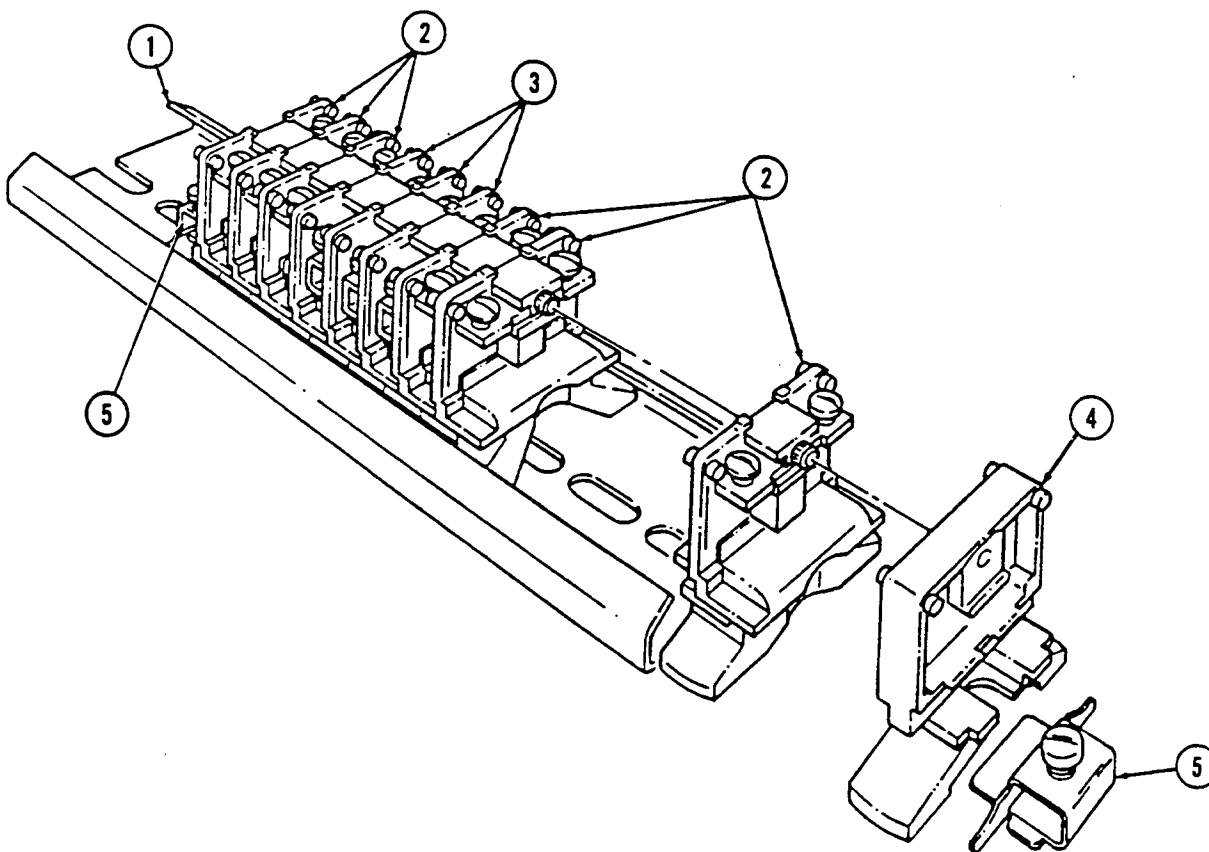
Channel, 7.00-in. (177.8 mm) and Terminal Block Assembly.
